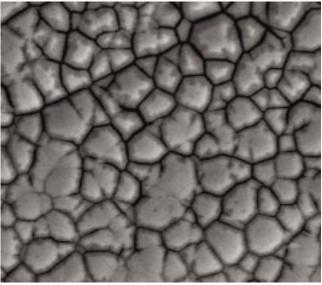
Typical Mud Crack Appearance of Black Pad Surface
